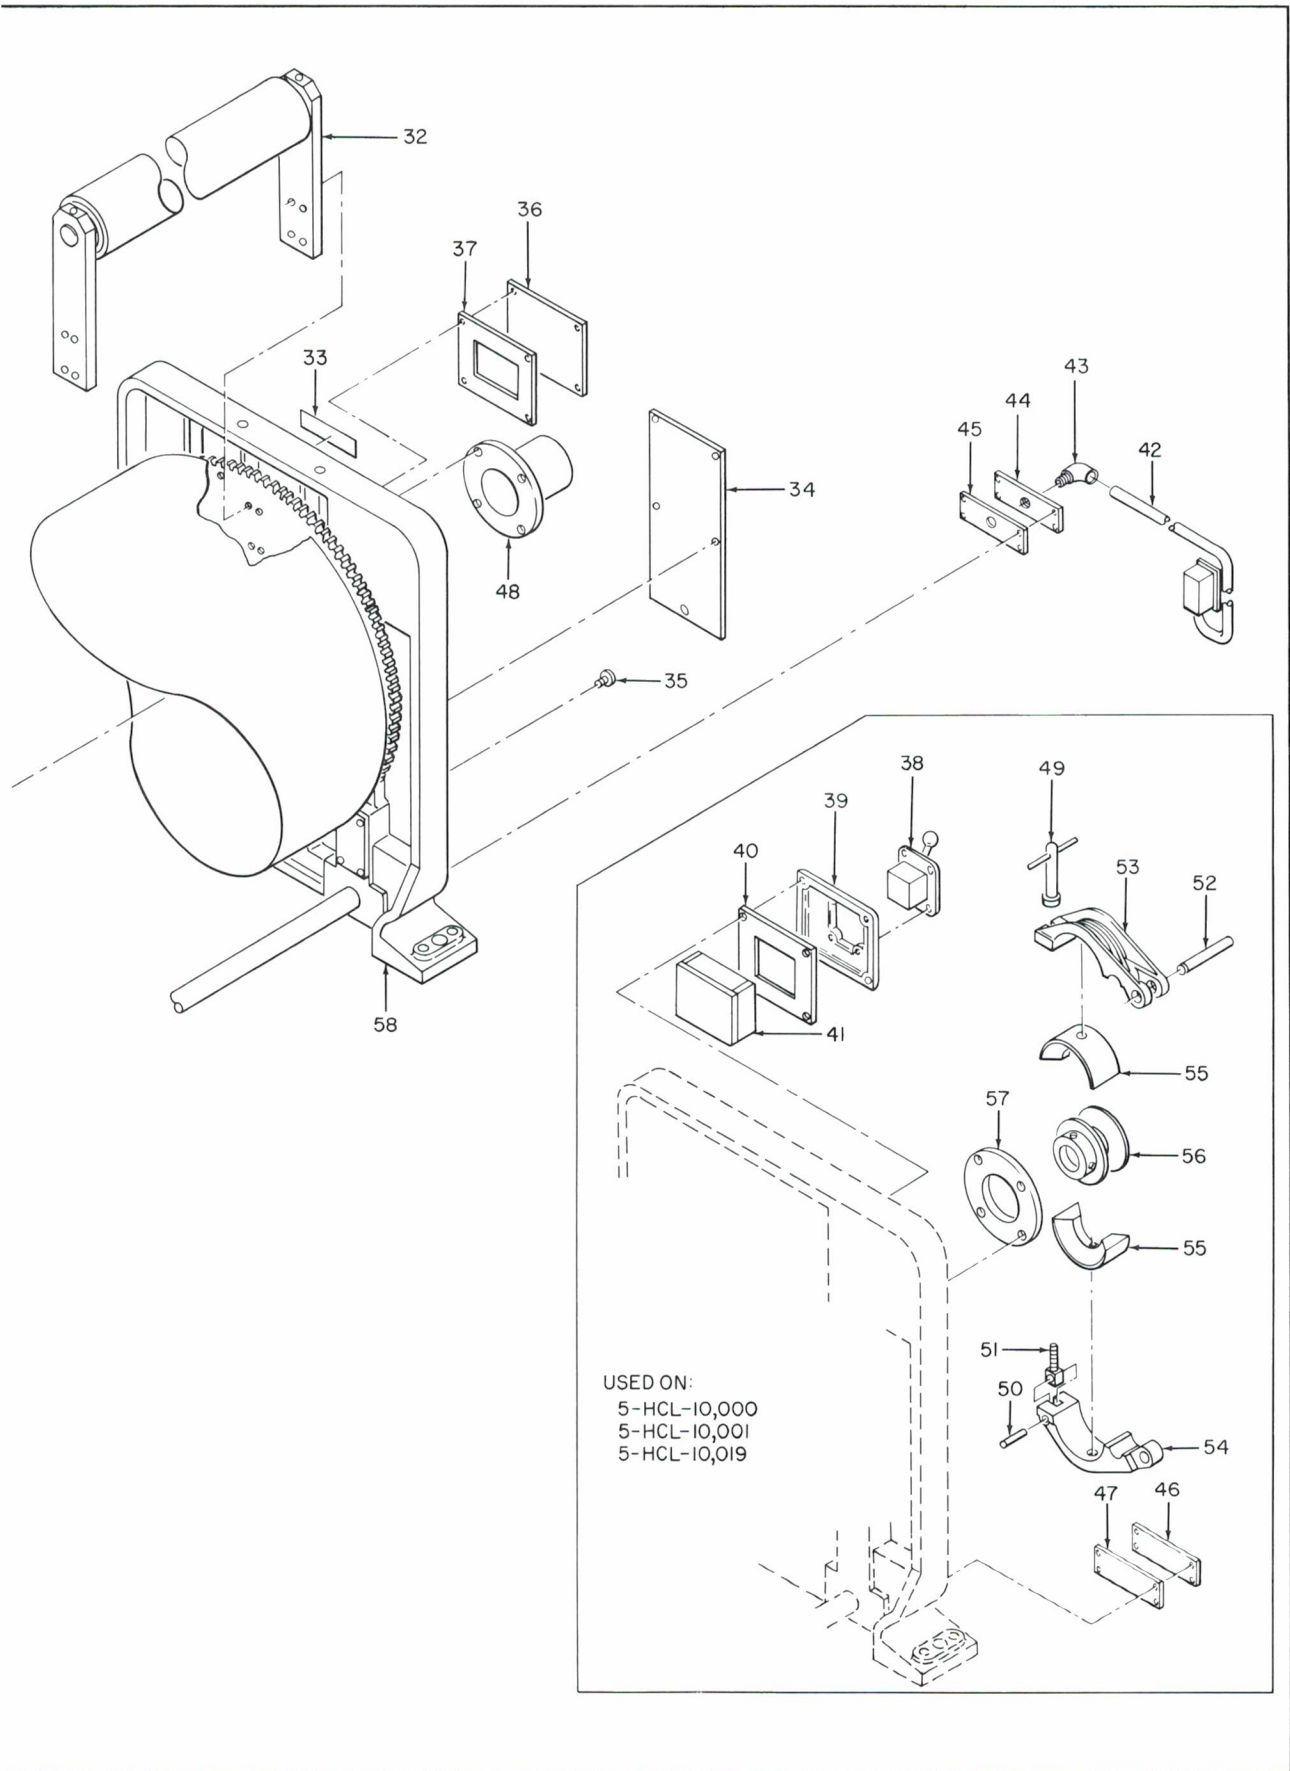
Model HCL Preheater Assembly (Sheet 2 of 2)
